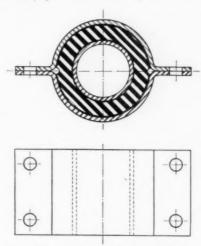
RUBBER COLLAR DESIGNED TO SURROUND A COLUMN
